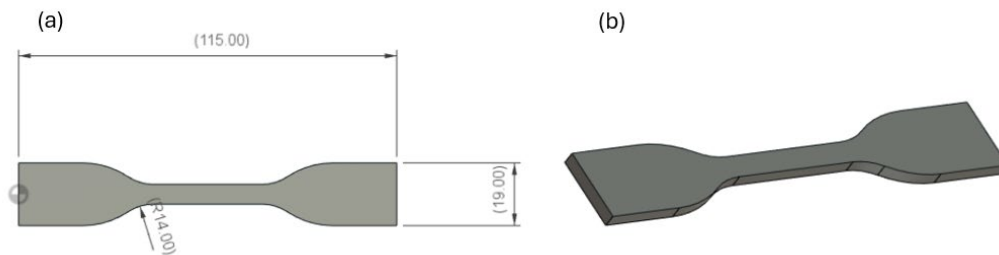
Design of the ASTM D638 type IV sample: (a) dimension of the sample, and (b) isometric view of the sample
